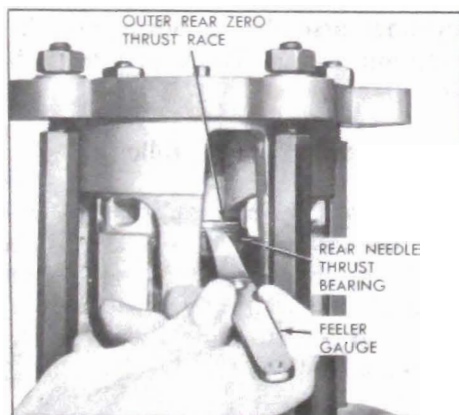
Gaging Clearance Between Rear Needle Thrust Bearing and Outer Rear Thrust Race
